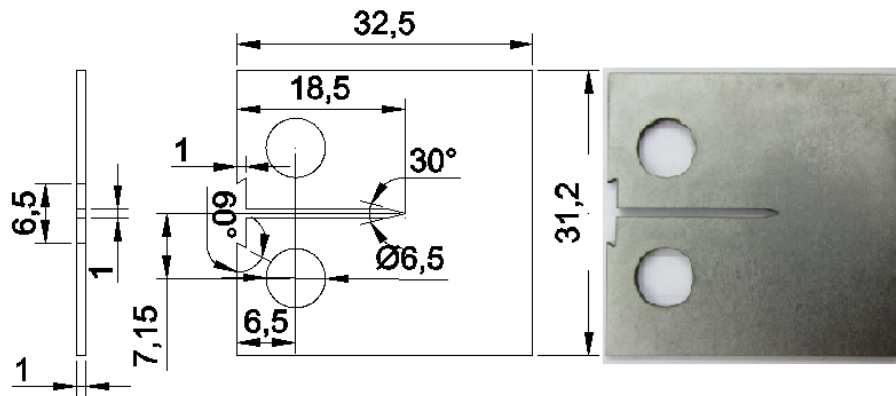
Dimensions of NiTi Fracture Test Specimen in mm.
